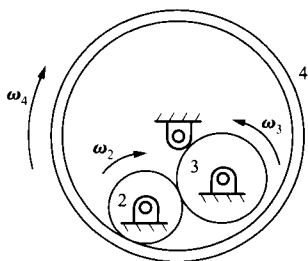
A simple gear train with internal gear and one idler (gear 3).
